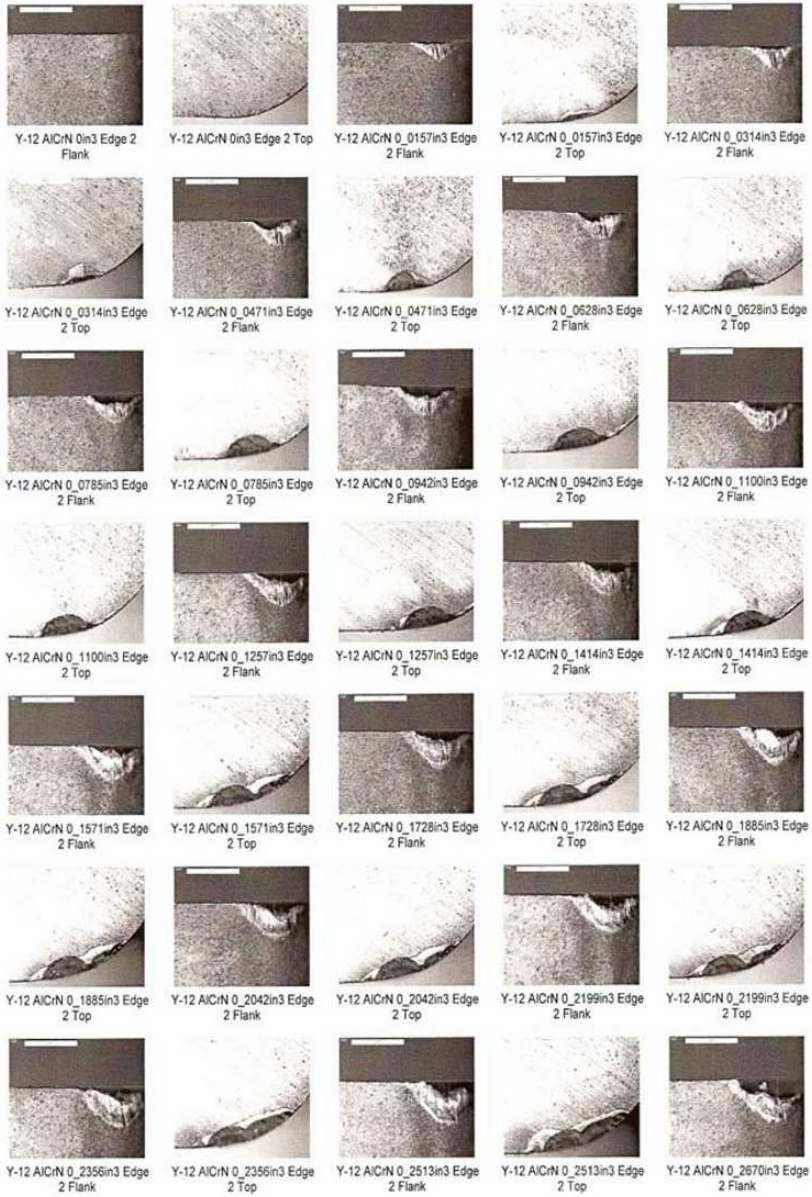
AlCrN Tool Cutting Edge 2 machined at 158 RPM. 0 - 0.2513 in³ workpiece removed
